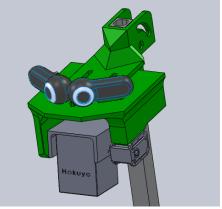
3D Printed Camera and Tilting Lidar Assembly
